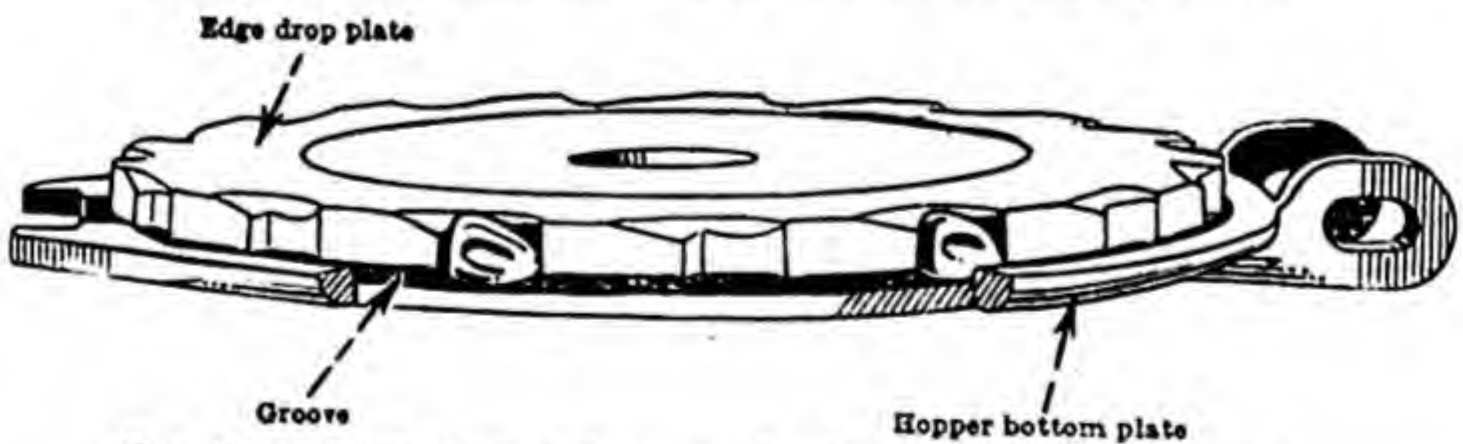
Edge-drop plate assembly showing position of kernel.
